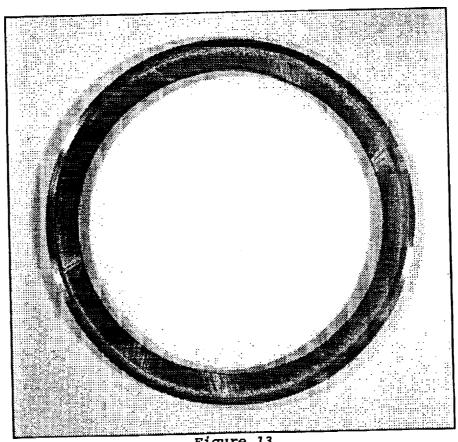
Brazed SiC Fiber/Metal Backing - Brush Seal
